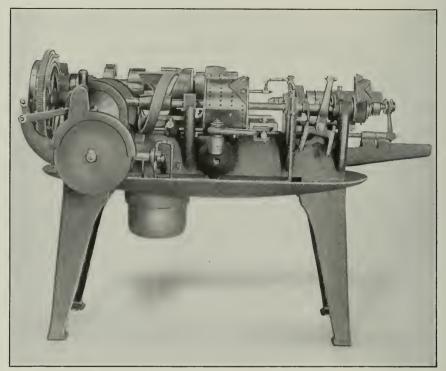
Cleveland Automatic Turret Machine (Rear View)
